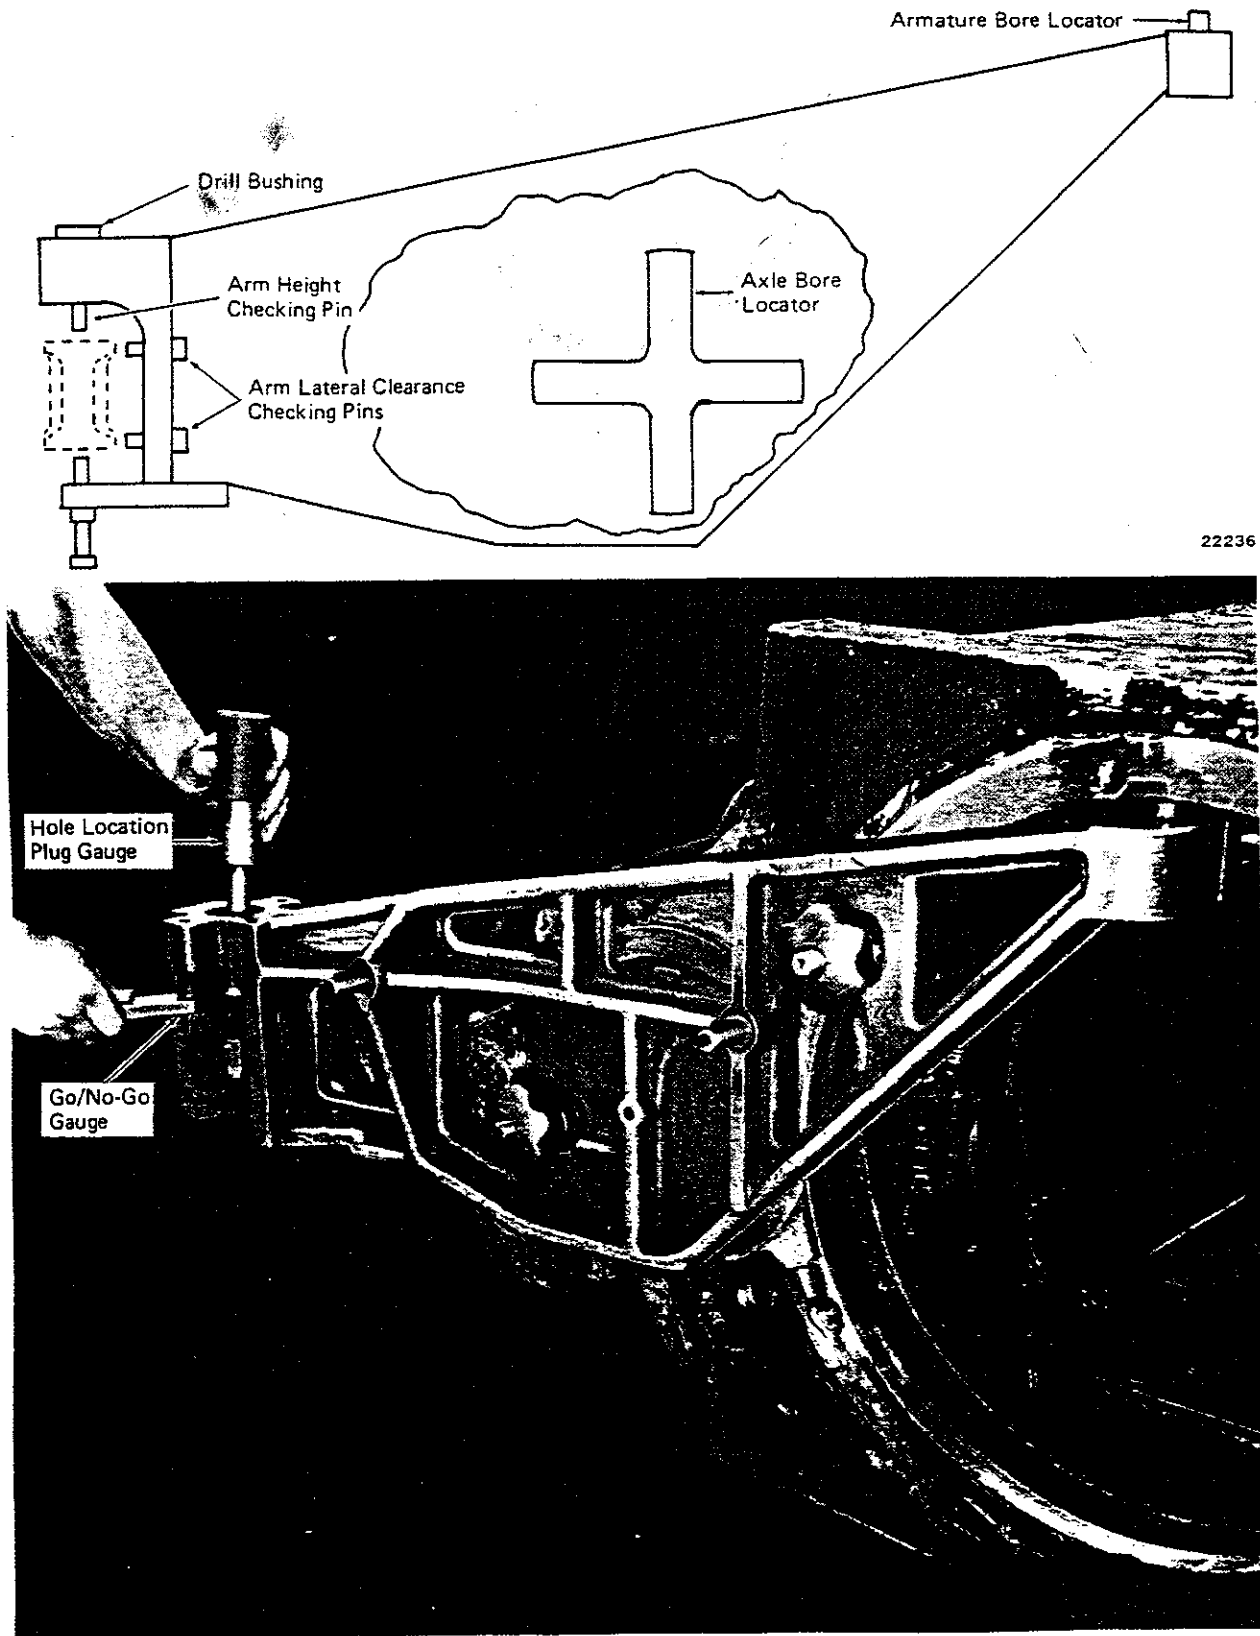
Pinion End Axle Cap Arm and Mounting Hole Locator Gauge and Drill Jig
